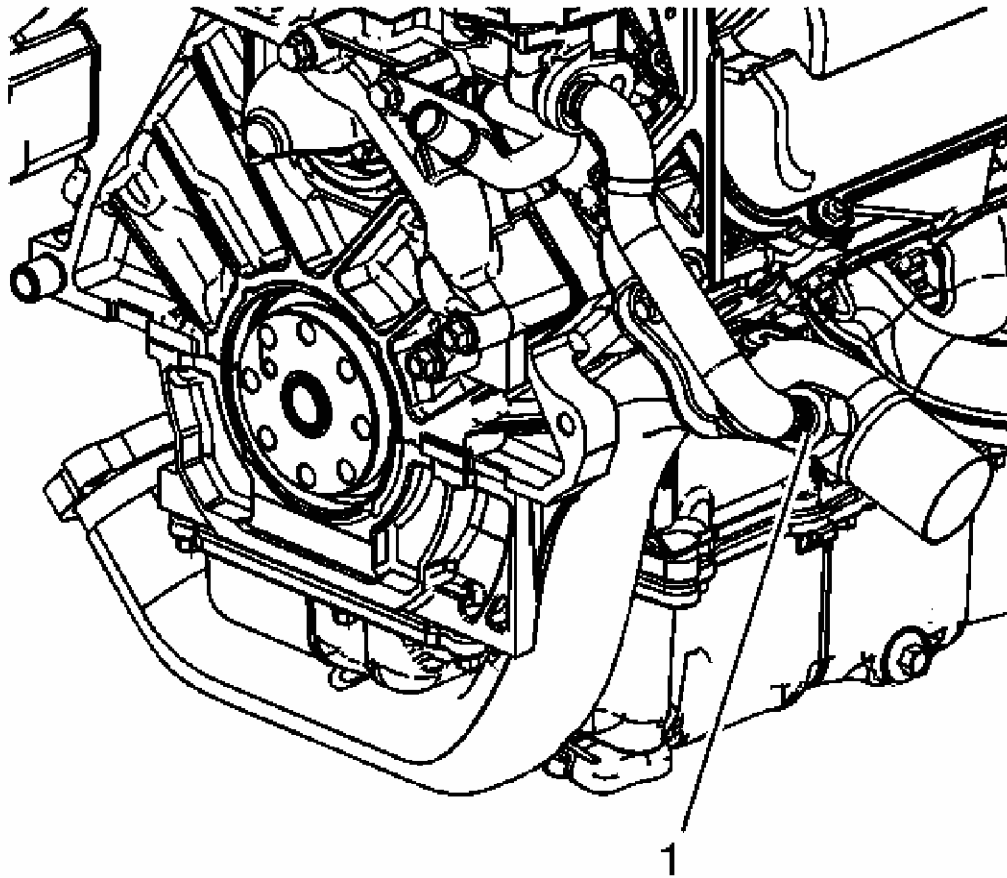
Identifying EGR Valve Inlet Pipe Nut
